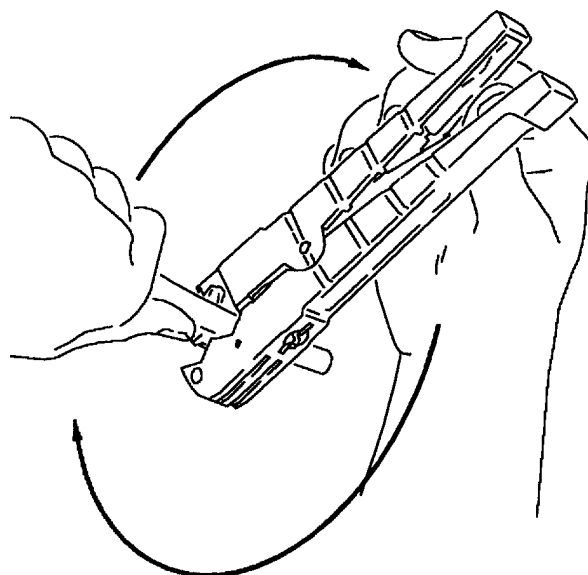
Inner Jacket Cut Adjustment9. USE.
